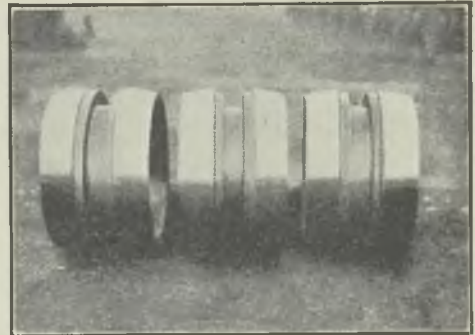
FINISHED CONE CASTINGS SHOWING GROOVES.
